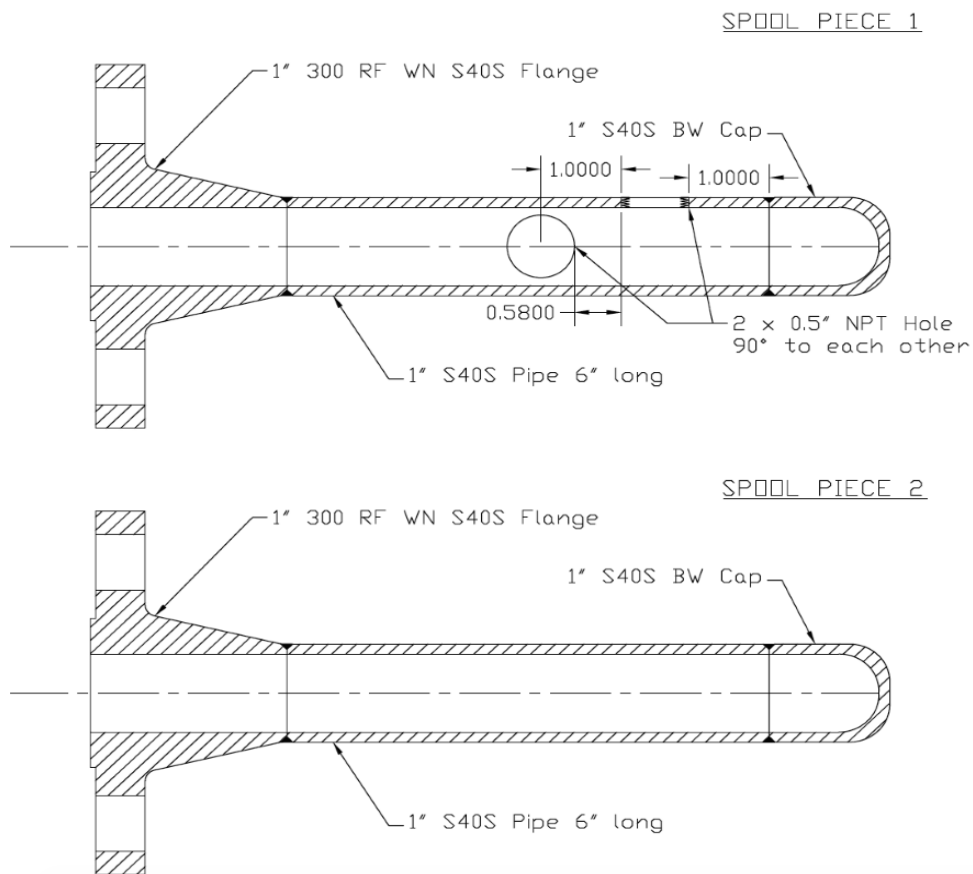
Detailed 2D drawing of the flange from Pro-Flange Ltd.
